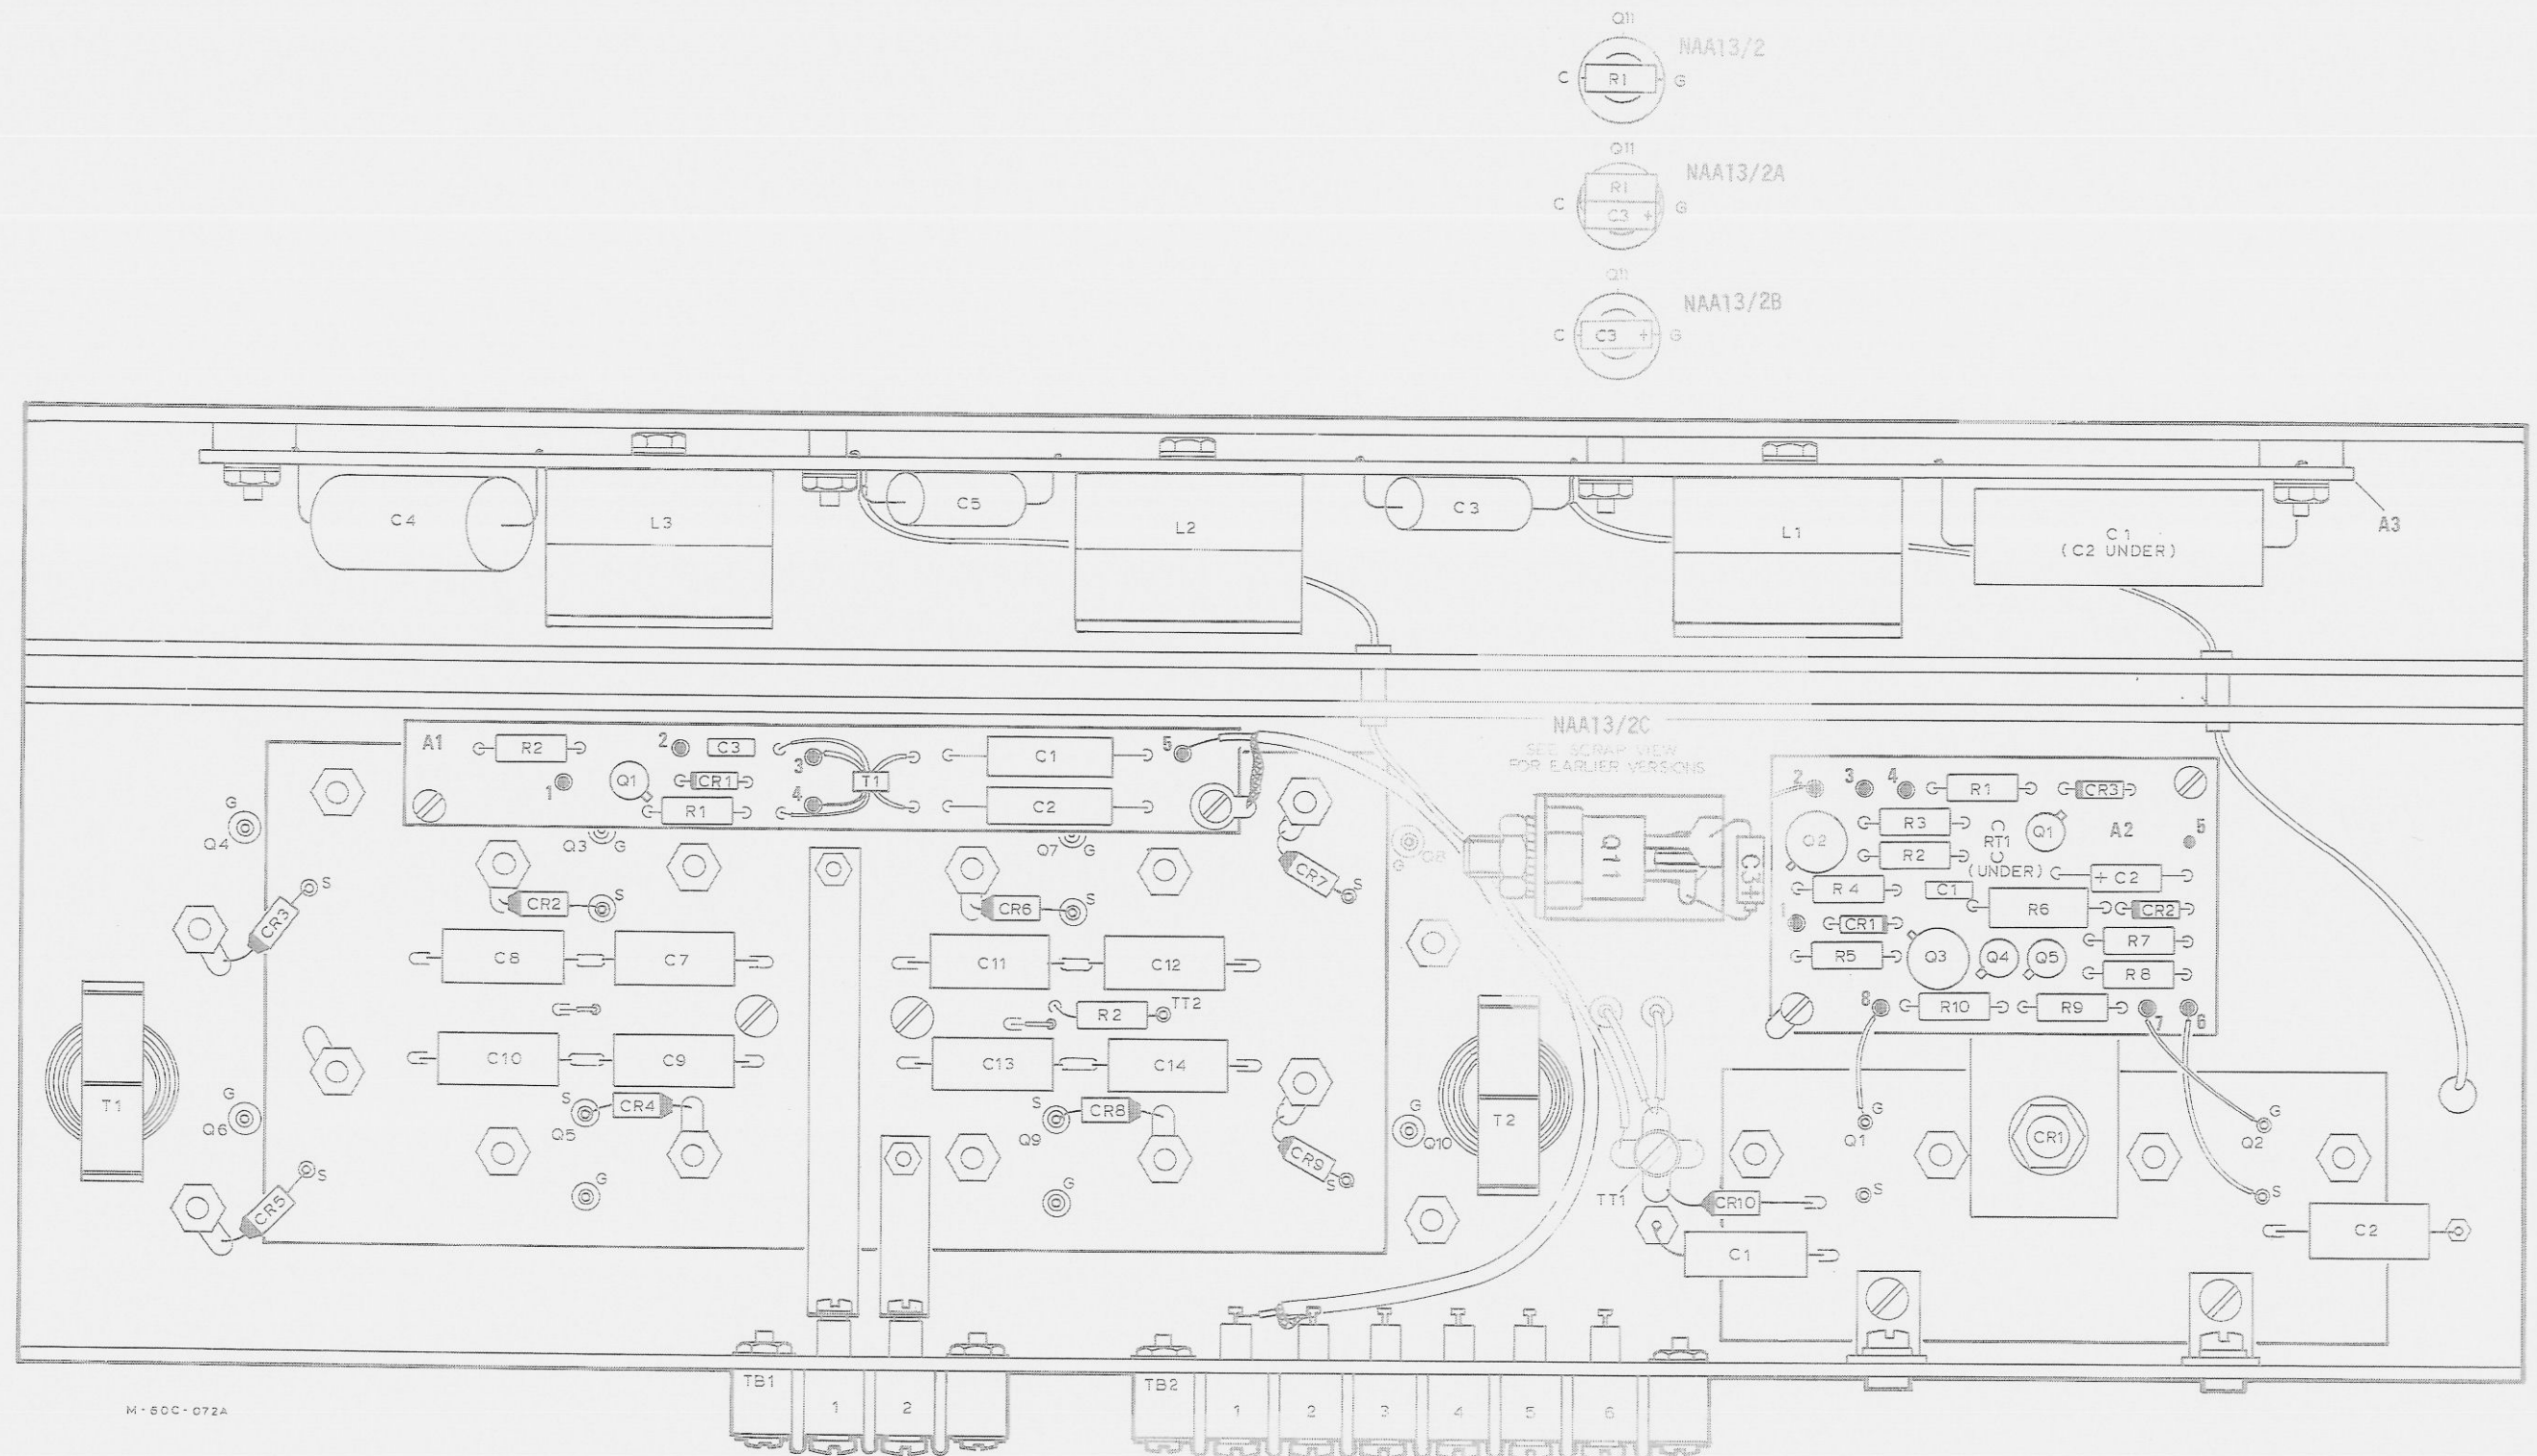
Assembly Detail - NAA13/2 Modulator/Power Amplifier Assembly (Side 2)
